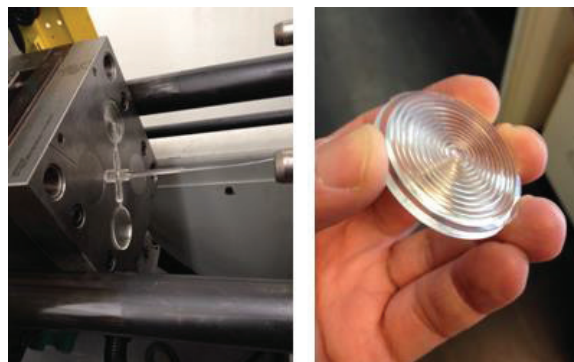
Open Tool with two cavities after molding (left) and single part (right)
